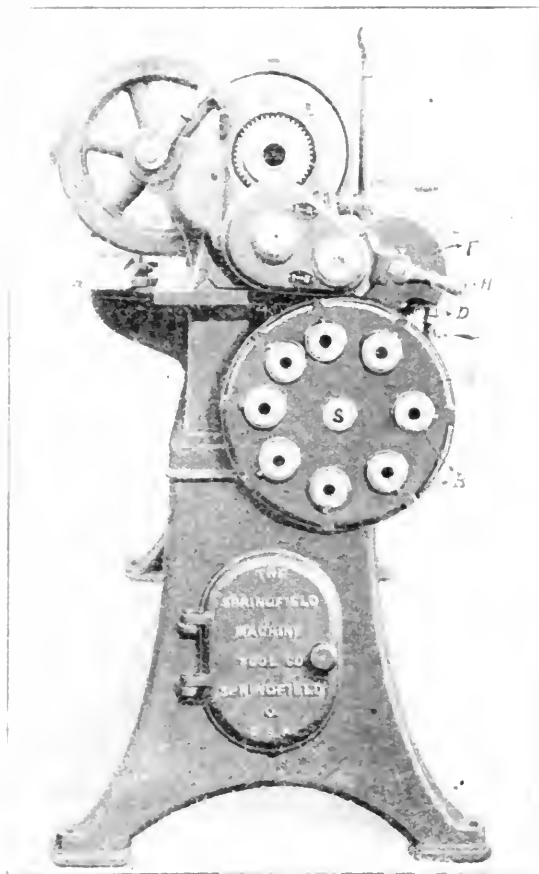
SIDE VIEW OF GEAR BOX SHOWING CLUTCHING DEVICE.
